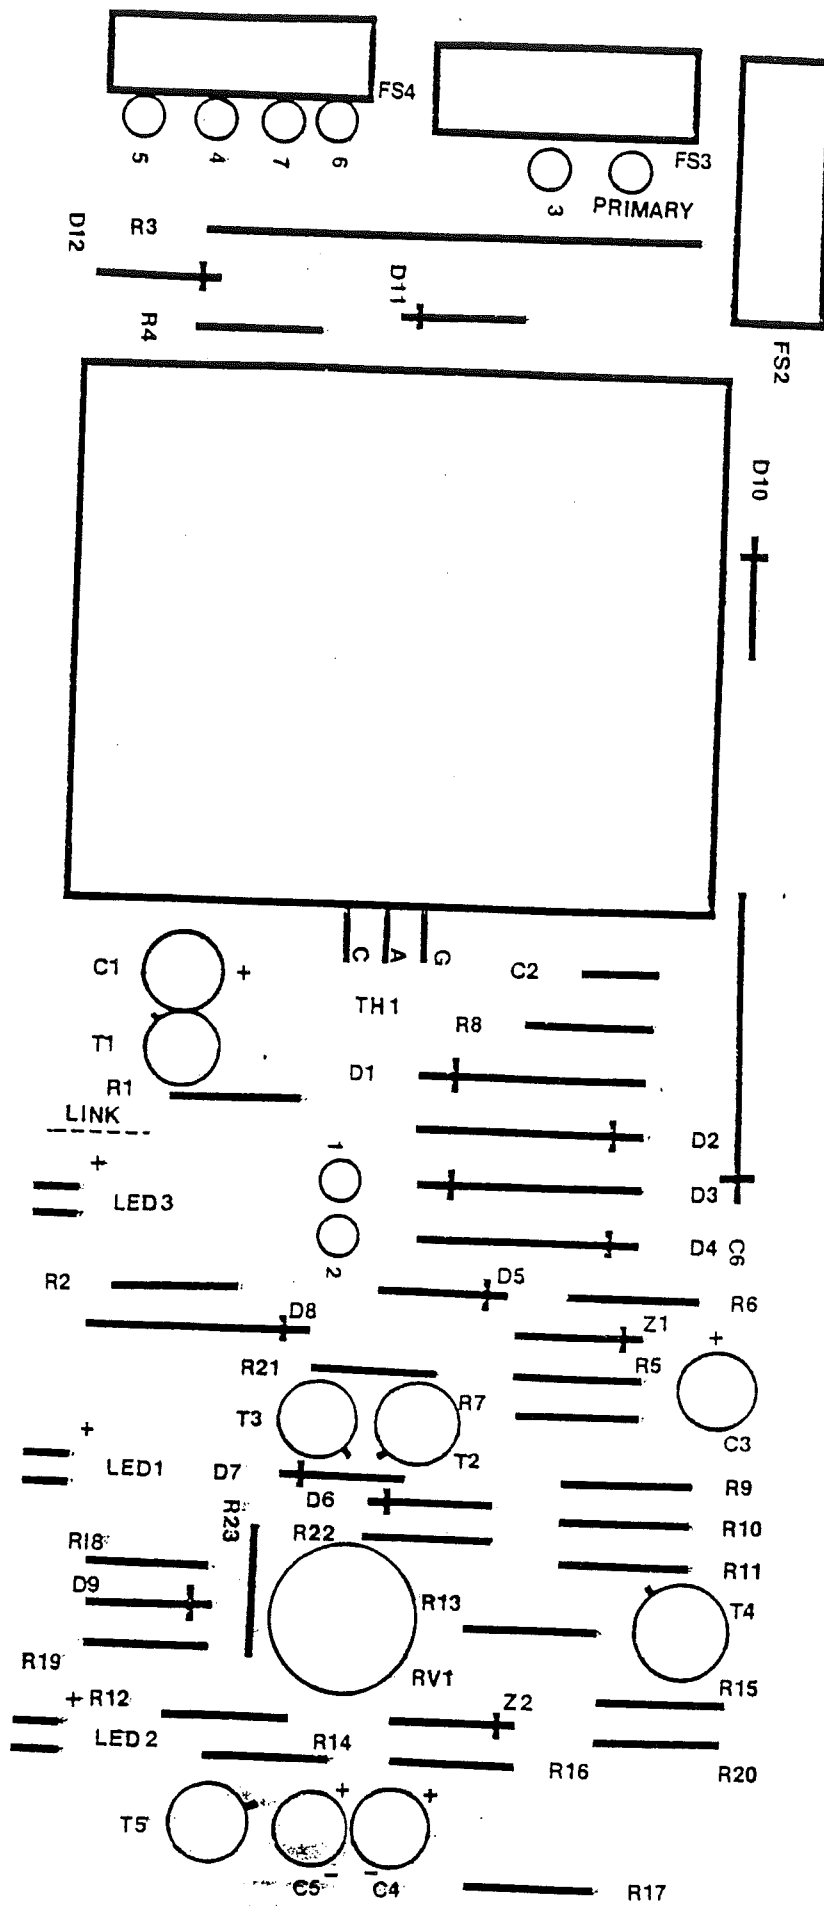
Type 24/10 Charger - P.C.B. Layout.
